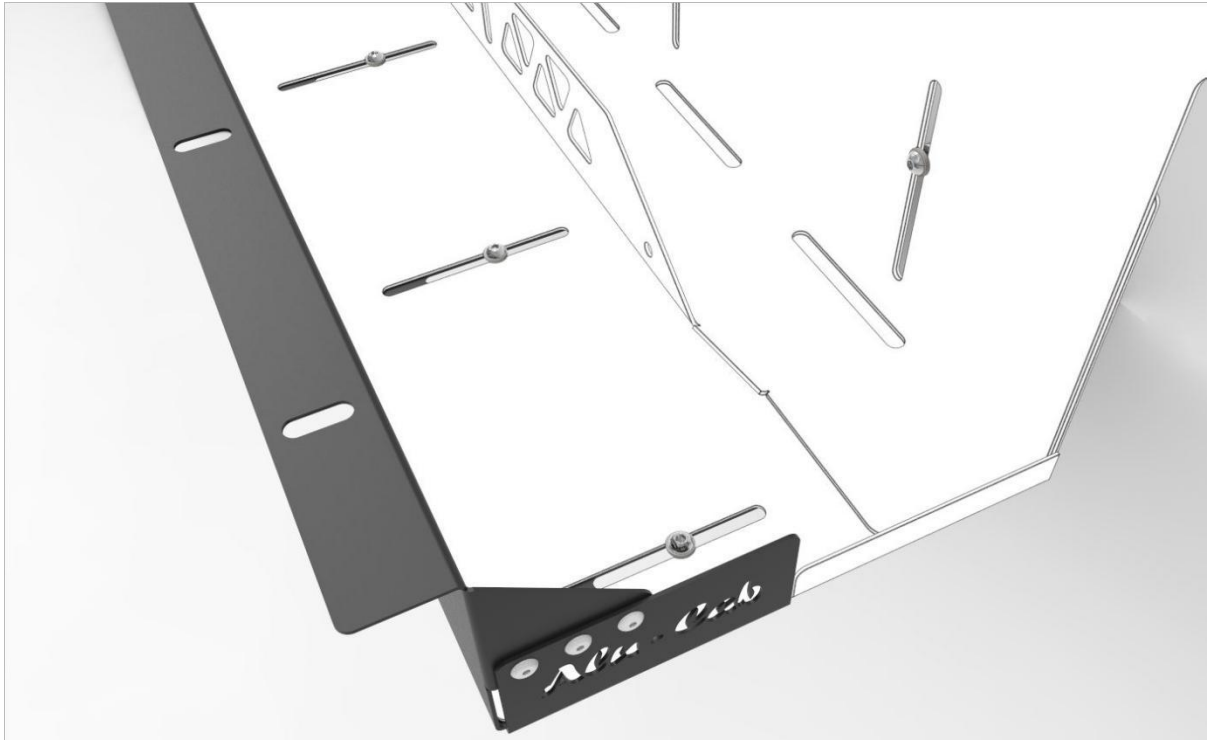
Place a Button Head Cap Screw in each slot with a washer
